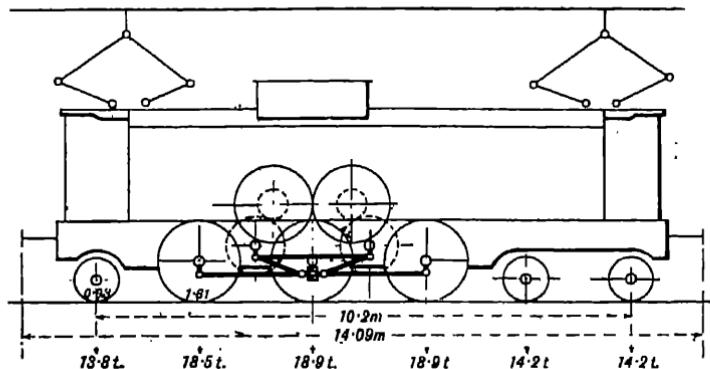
Diagram of electric locomotive by the *Machinenfabrik Oerlikon*, type with two motors, side rod and gear.
